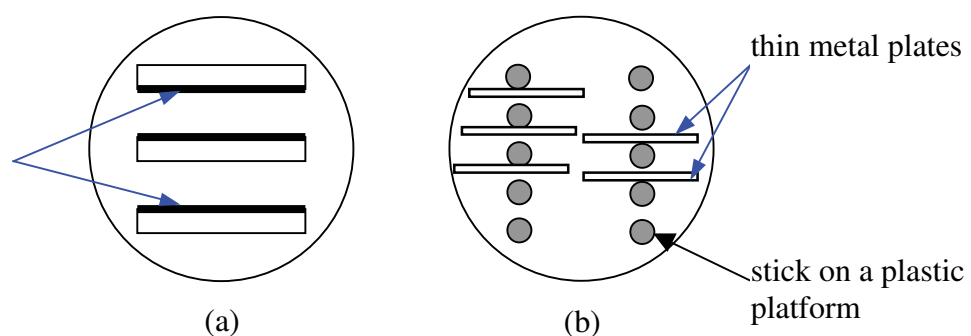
a) arrangement of several test specimens in one form; b) the cross section of a clamp device to support thin plates of testing specimen
